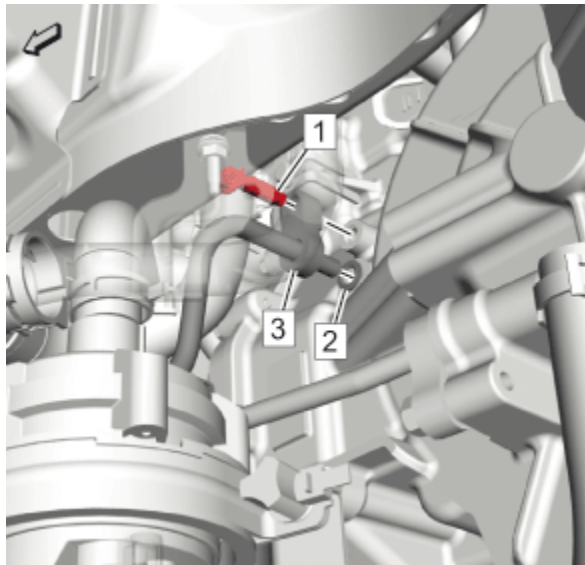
Transmission Fluid Cooler Inlet Pipe, Bolt And Sealing Washer
